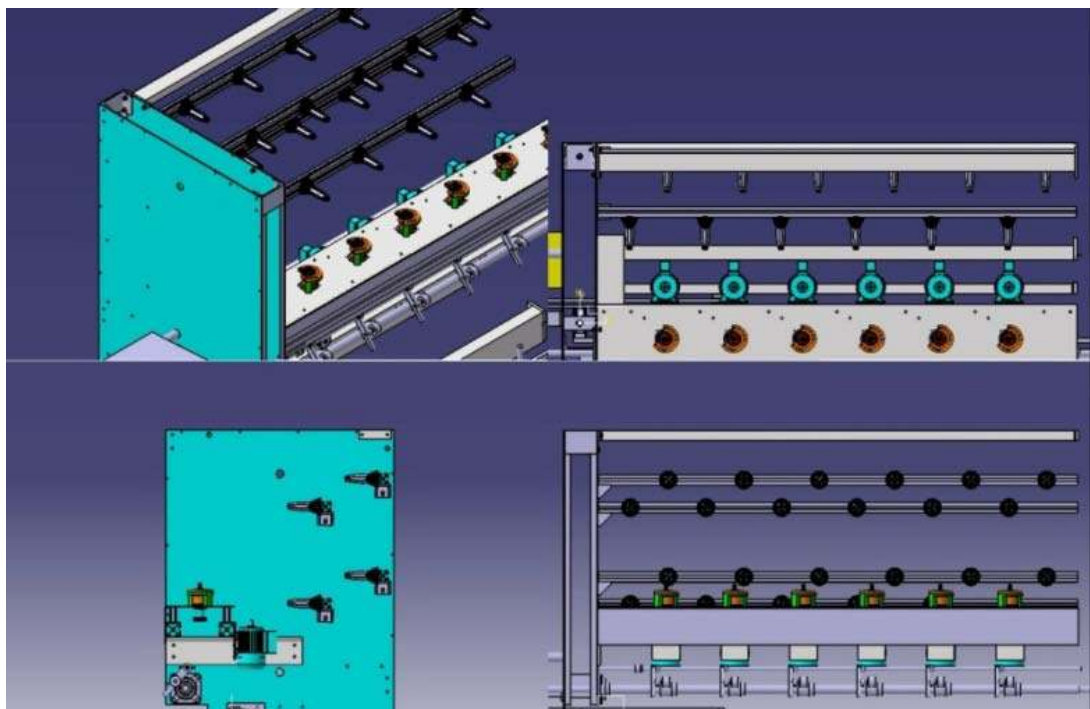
Creels of the fancy yarn machine. Picture is drawn on Catia.
